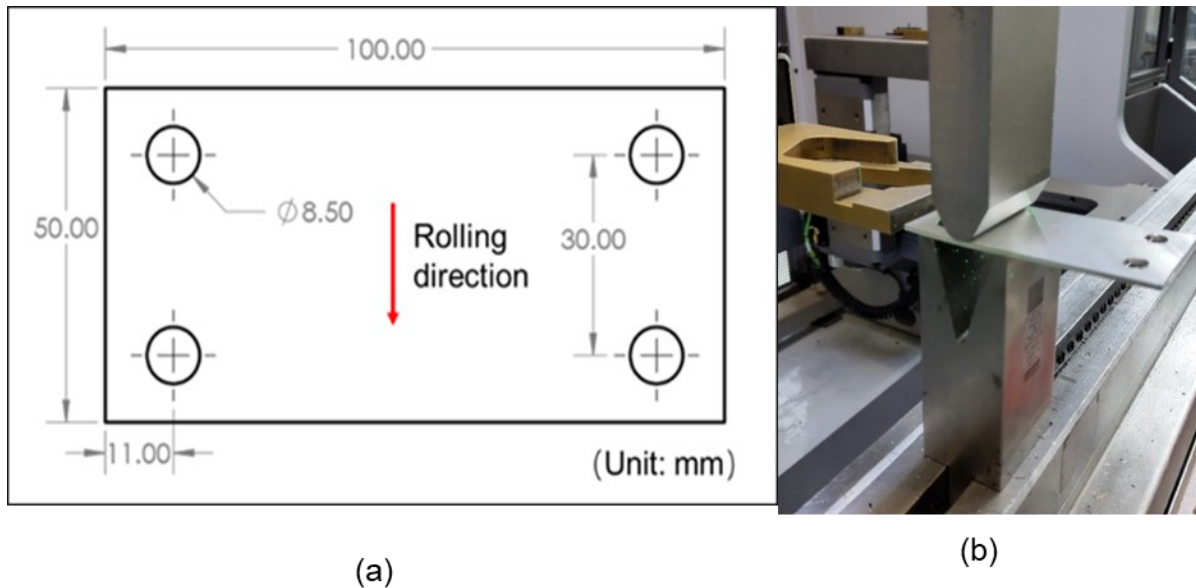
(A) DIMENSIONS OF THE KS-8 SAMPLE AFTER CUTTING AND DRILLING (B) THE BENDING PROCESS BY AN ANGLED HYDRAULIC PRESS
